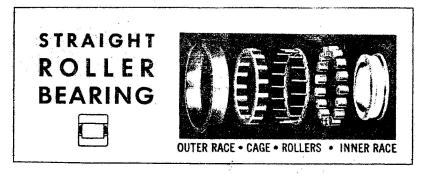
Straight Roller Bearing - Outer Race Cage-Rollers-Inner Races
